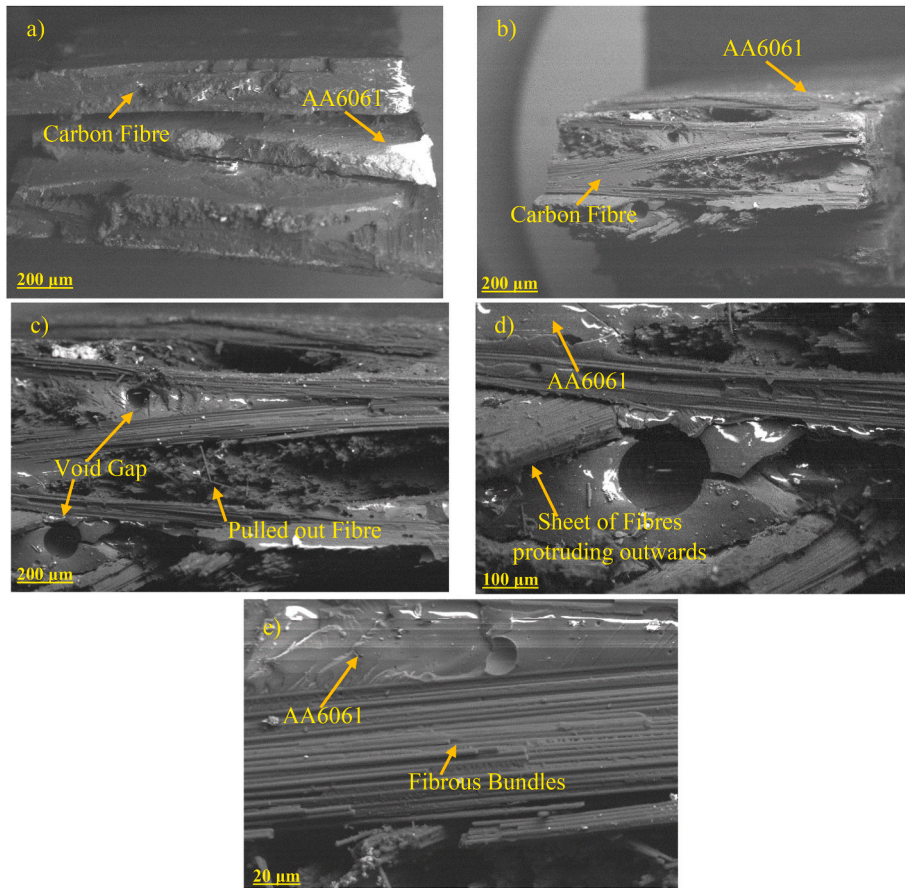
Fractography of Fibre Metal Laminates at the failure zone at various magnifications: (a) cross sectional view, (b) magnified view, (c) damage mechanism, (d) magnified view of damaged mechanism, and (e) cross-sectional view of joined layers.
